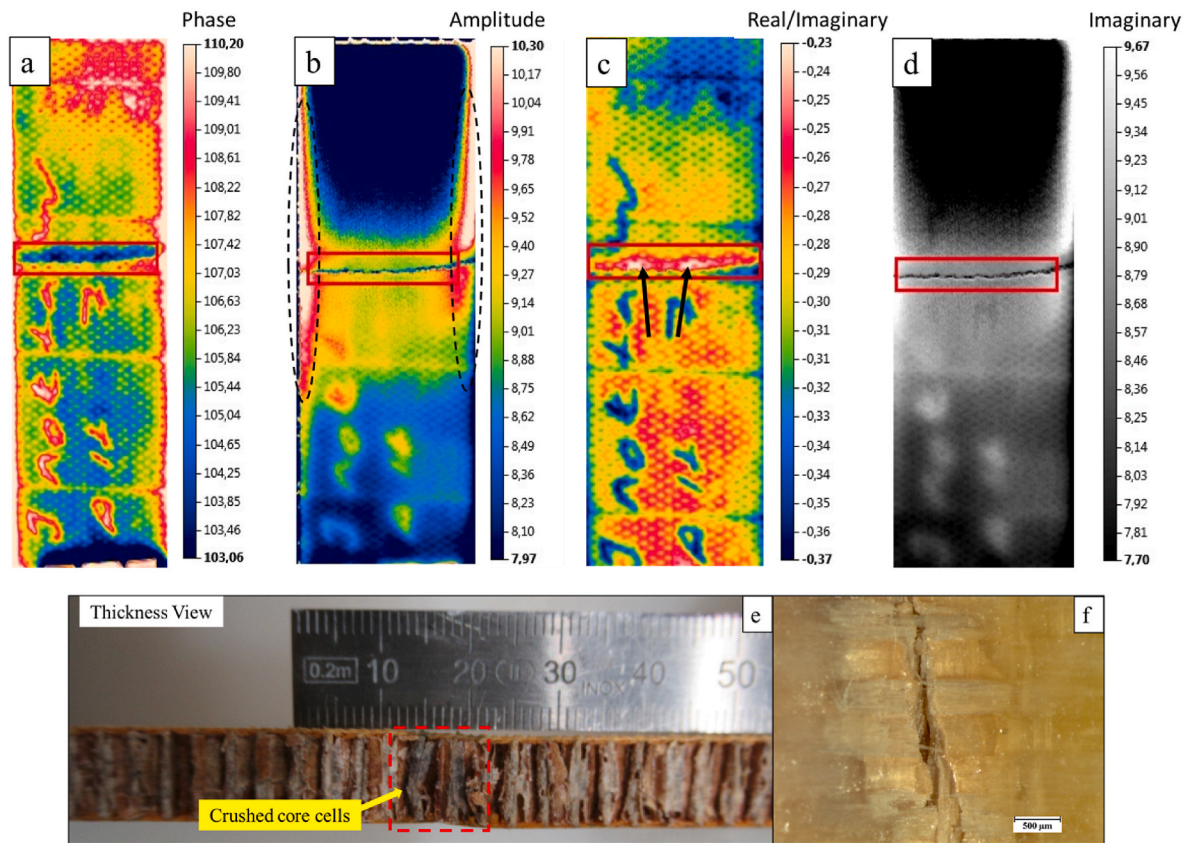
(a–d) Thermograph of final failure of specimen 1 after non-interrupted test; (e) image of the failure area on the edge; (f) micrograph of the failure crack on face sheet.
